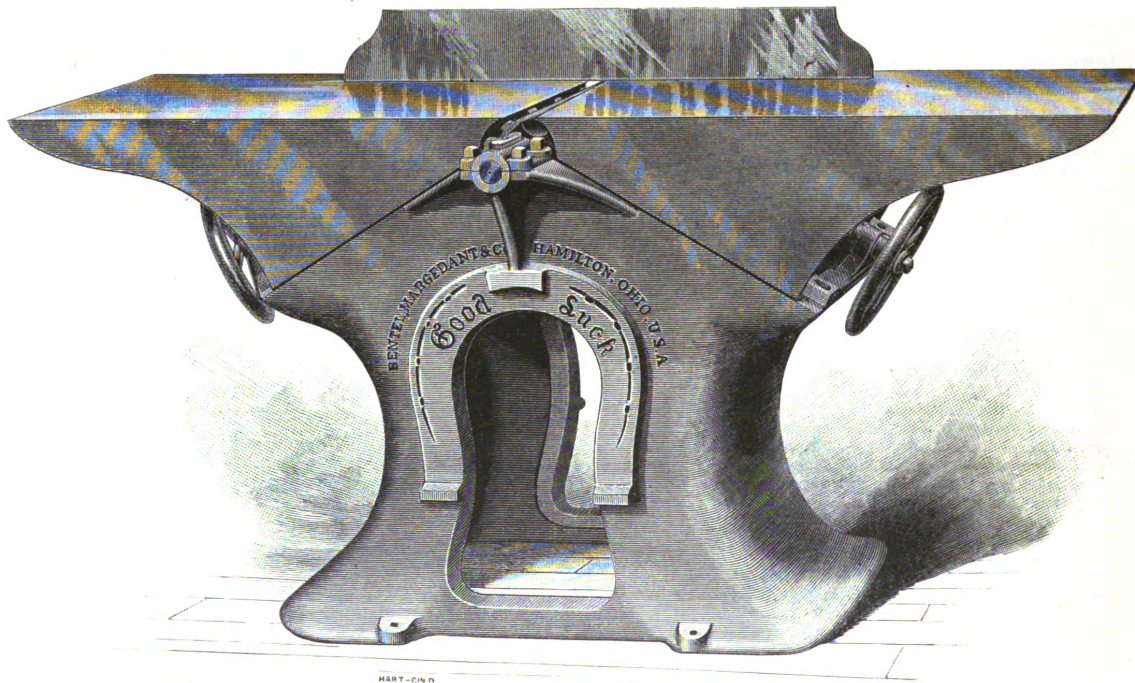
Good Luck Hand Planer and Jointer. Made by the Bentel & Margedant Company.
